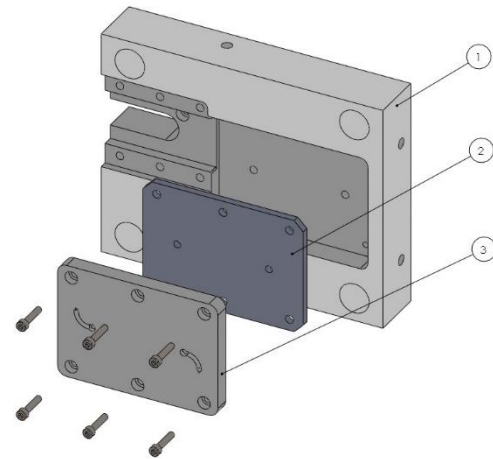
Exploded view of the mold plate and the molding insert, 1) Mold plate; 2) Support plate; 3) Stereolithography molding insert
